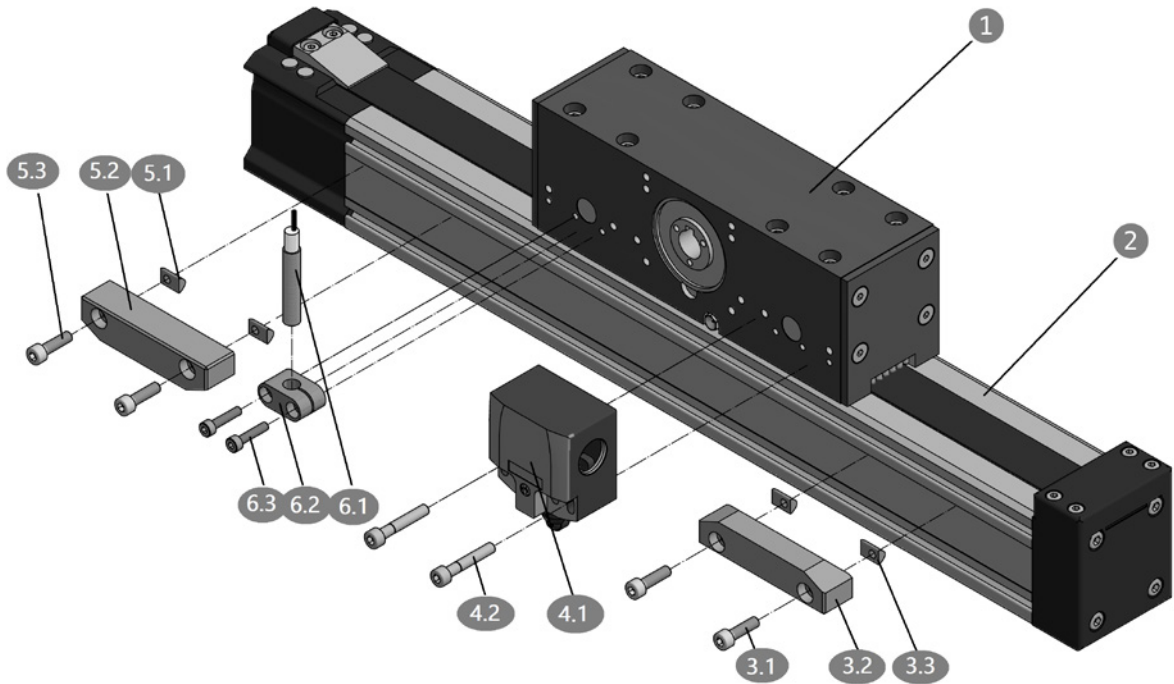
Mounting of limit switches on the drive head of Linear Axis AXE_A with moved profile
